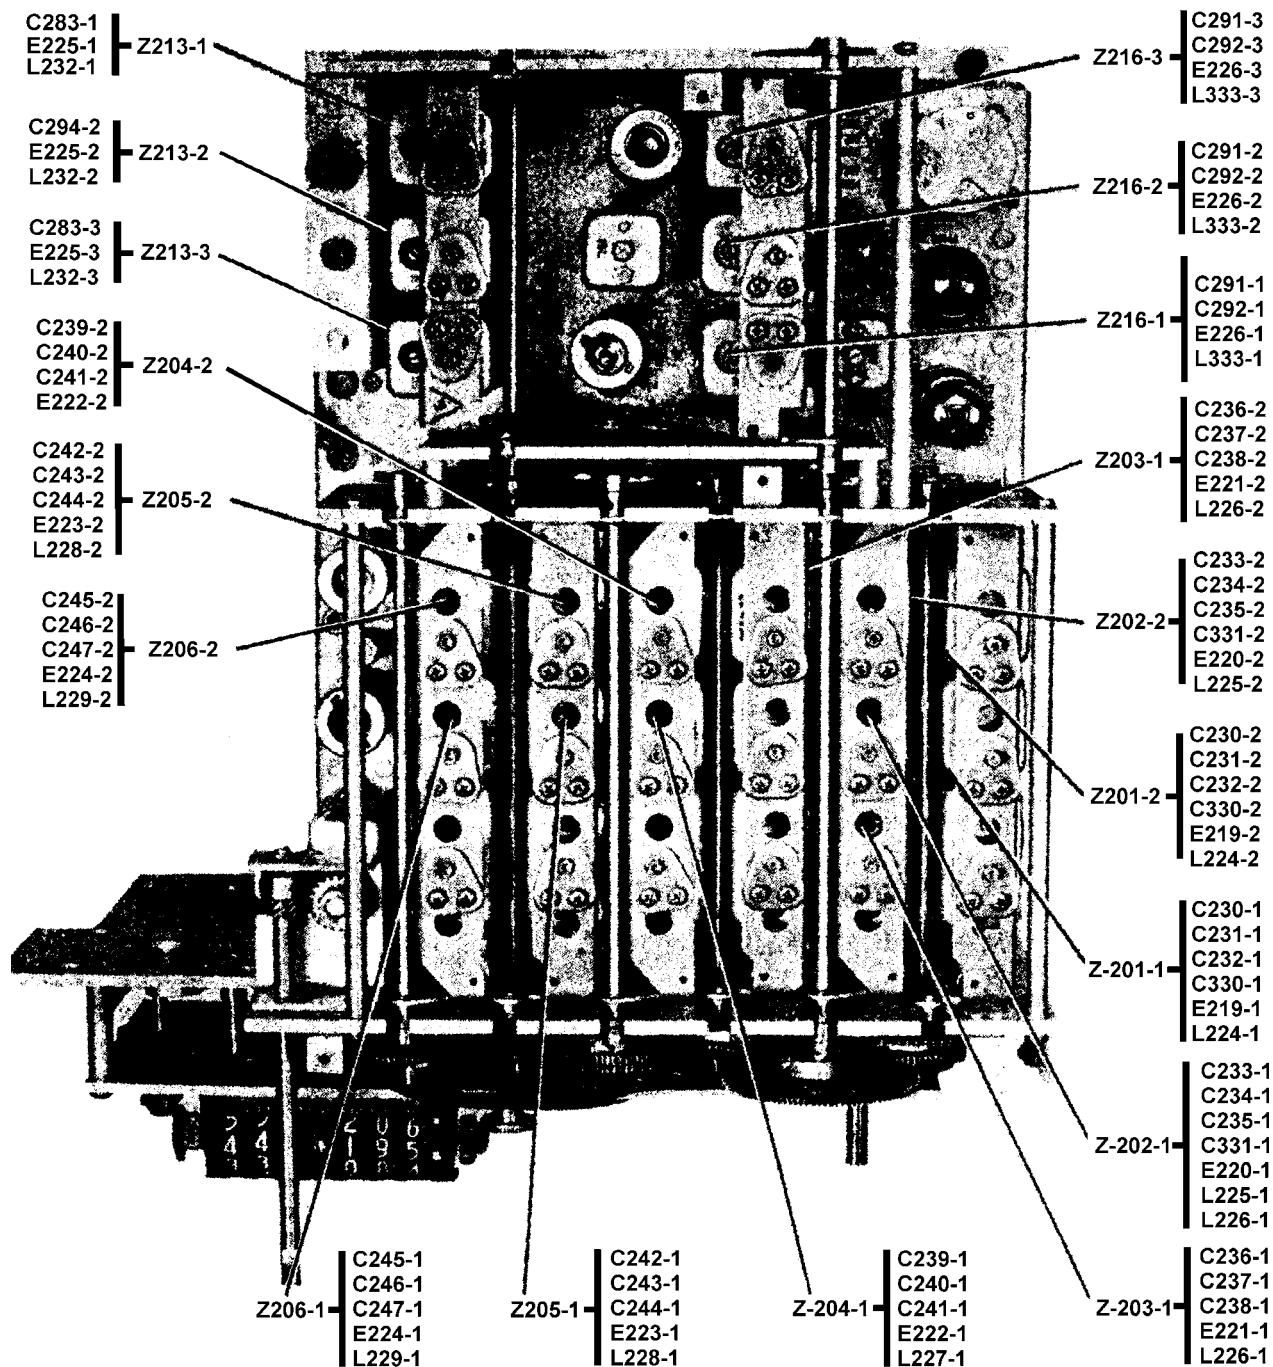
RF Sub-chassis, Top View (Sheet 2 of 2)
